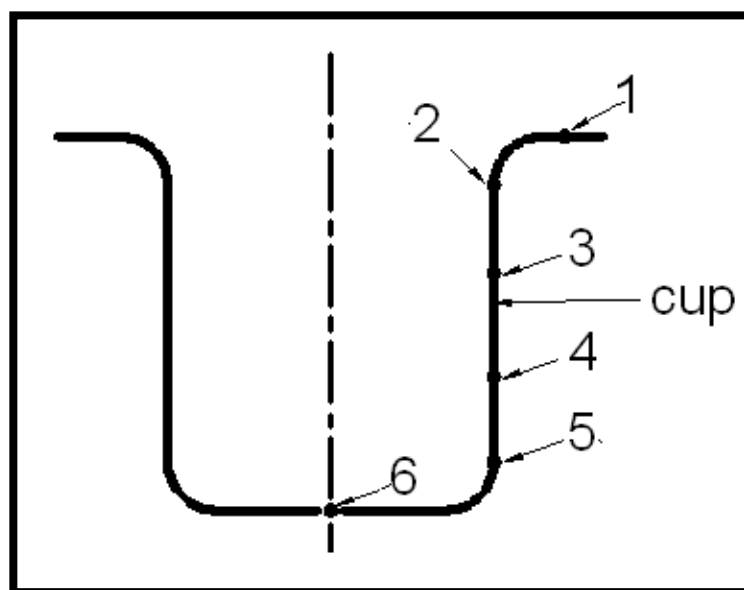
Thickness measurement locations on the surfaces of the cup
